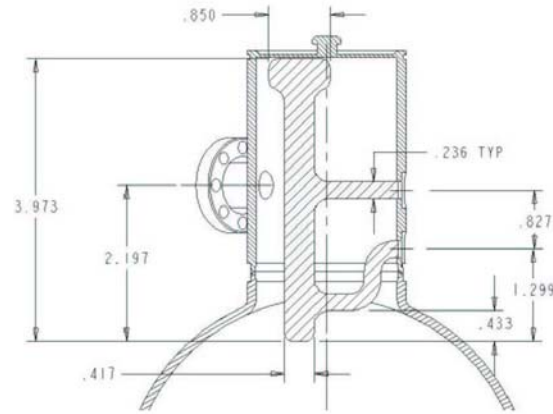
HOM damper with built in fundamental filter (dimensions in inches)
